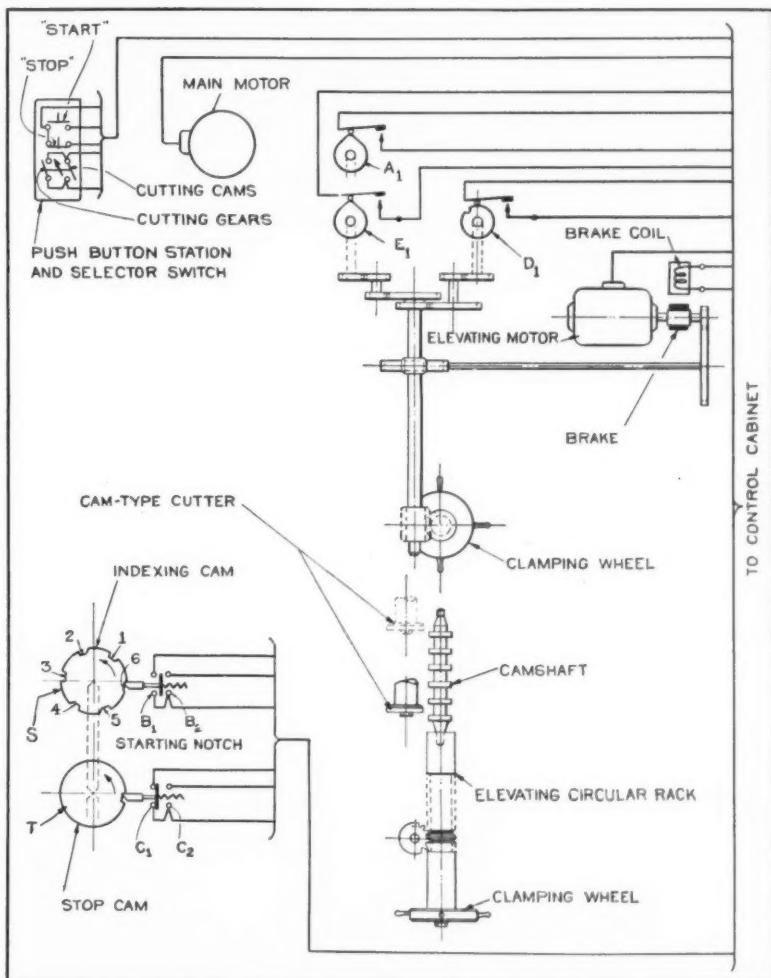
Diagram Illustrating the Arrangement of the Gear Shaper Work-elevating Mechanism and its Motor Drive
